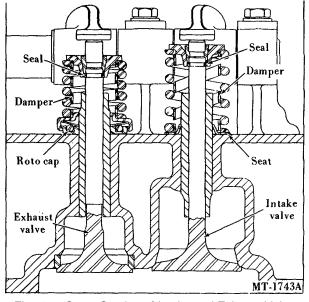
Cross Section of Intake and Exhaust Valves Installed in Head.
